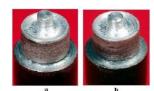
Tool pin profiles (a) Straight cylindrical threaded (ST) (b) taper cylindrical threaded (TT)
